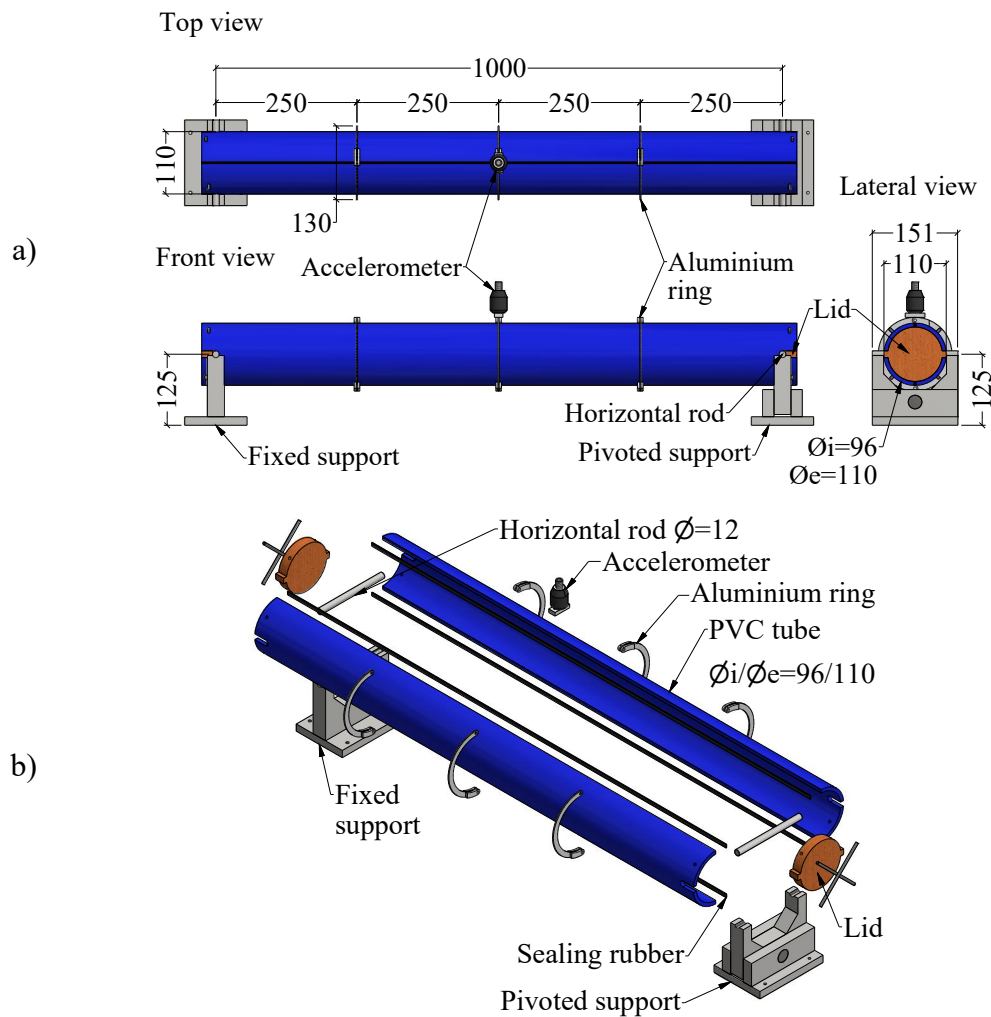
Reusable mould for EMM-ARM tests: a) Scheme; b) 3D exploded view [units: mm].
